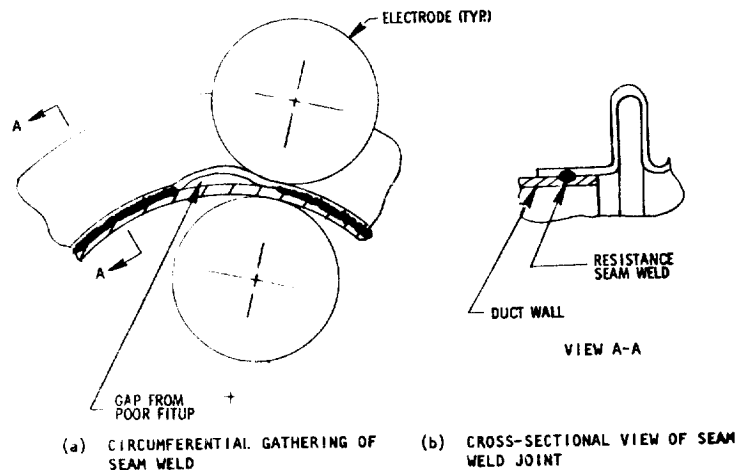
Fitup problem with resistance seam welding of thin-wall ducts.
